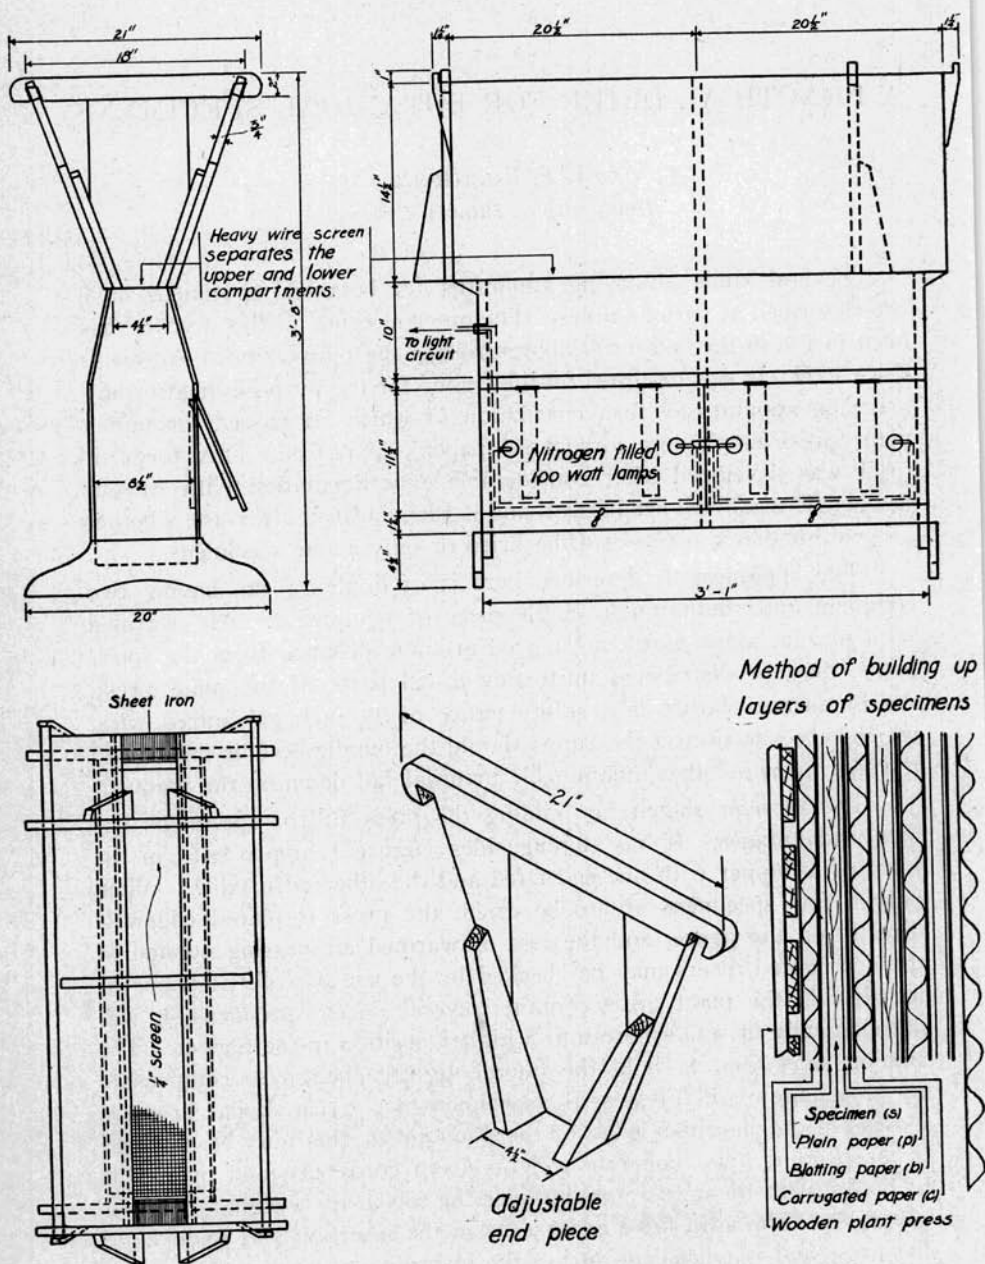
Above—Design of plant drier, end and side views; dimensions are given in inches. Below—Top view of hopper showing 1/4-inch screen gauze, adjustable end piece, and the proper method of building up a press using corrugated separators.
